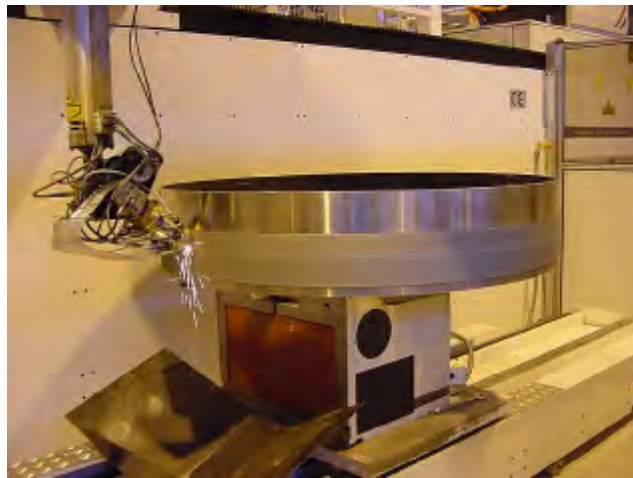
to 13 present some examples of industrial components coated by laser. A by-pass valve spindle used in power plants is shown in Figure 9. Several areas of the valve spindle are coated by laser to make the component resistant against high temperature, corrosion and wear. The component was originally uncoated, but after laser coating the performance and lifetime was significantly improved from the original uncoated one. Figure 10 in shows laser coating of a large shaft sleeve with a diameter of 1.5 m. Such relatively large surfaces can also be economically coated by laser.
